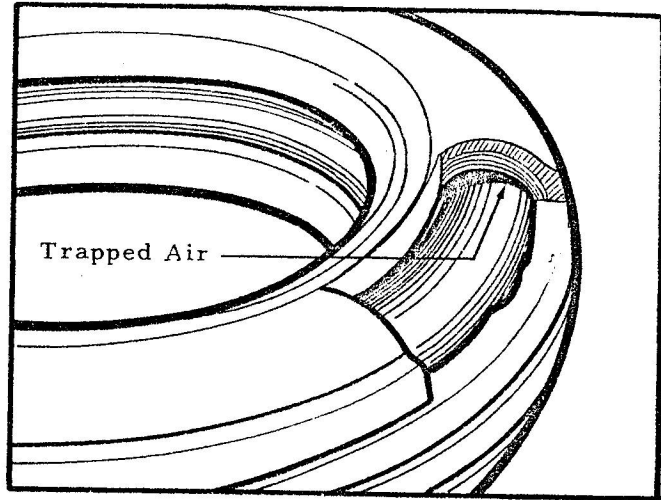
Window Cut in Tire to Show Location of Trapped Air
